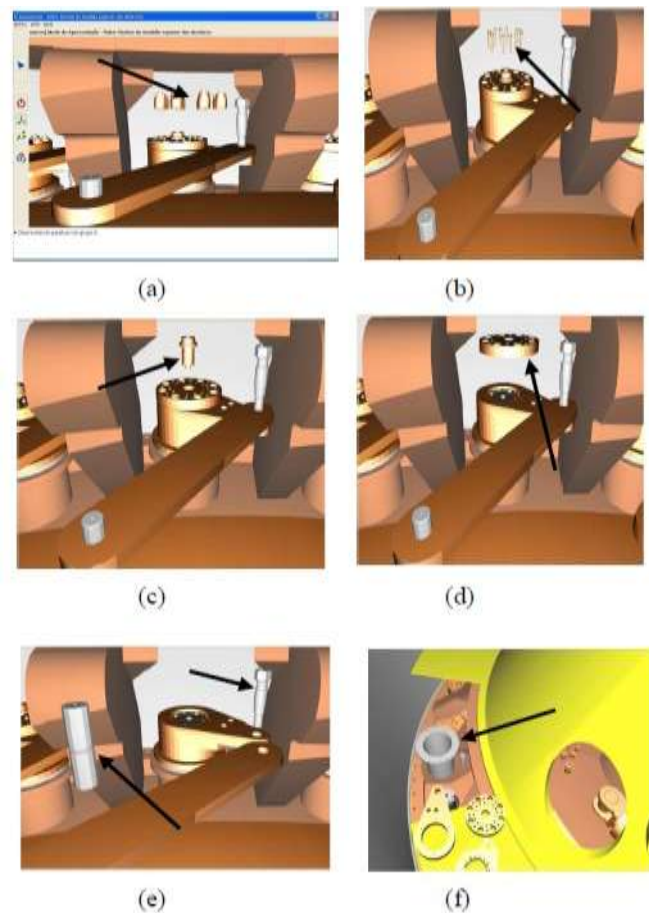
Superior cap bushing maintenance operation: (a) removing group A of screws; (b) removing group B of screws; (c) removing handle axis screw; (d) removing handle cover; (e) removing rupture pin and rod, and; (f) removal of the bushing.
